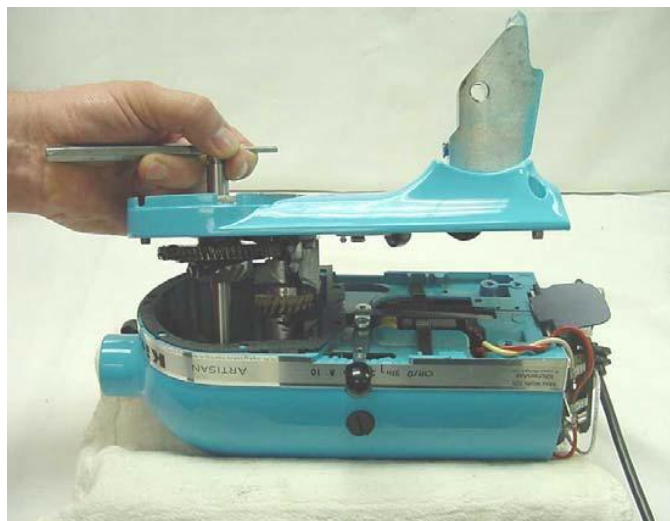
Secure the three lock washer screw assemblies into the bottom cover.
